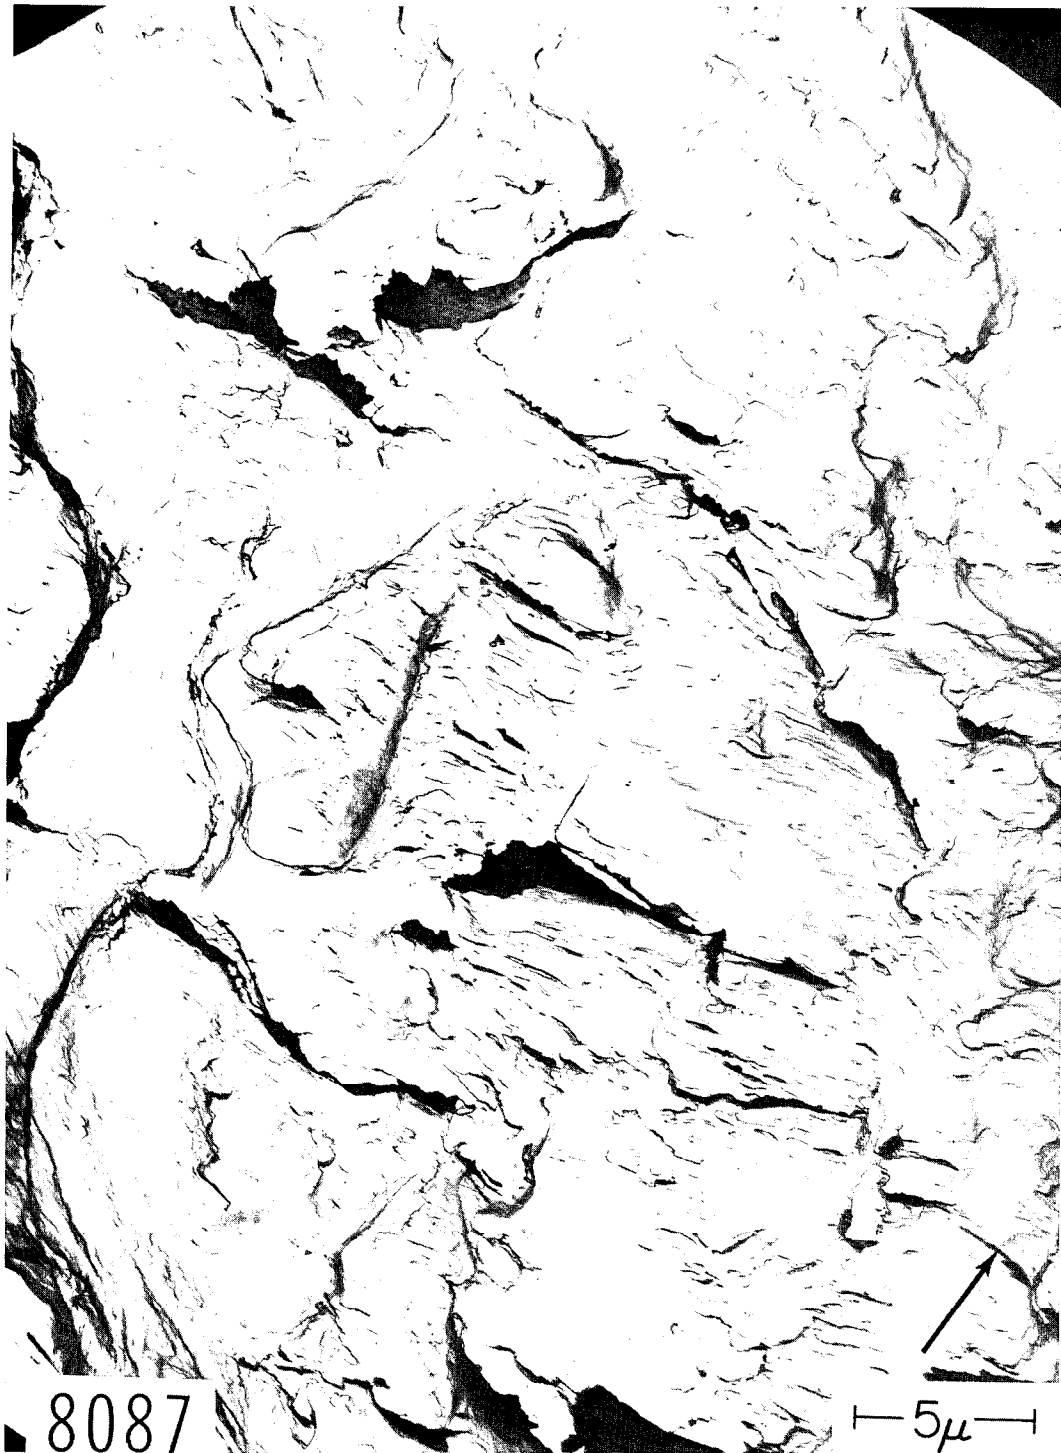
Fatigue markings in 250 KSI yield strength maraging steel weld metal. Cellulose acetate-carbon replication technique. Palladium shadowed. 6000X.
